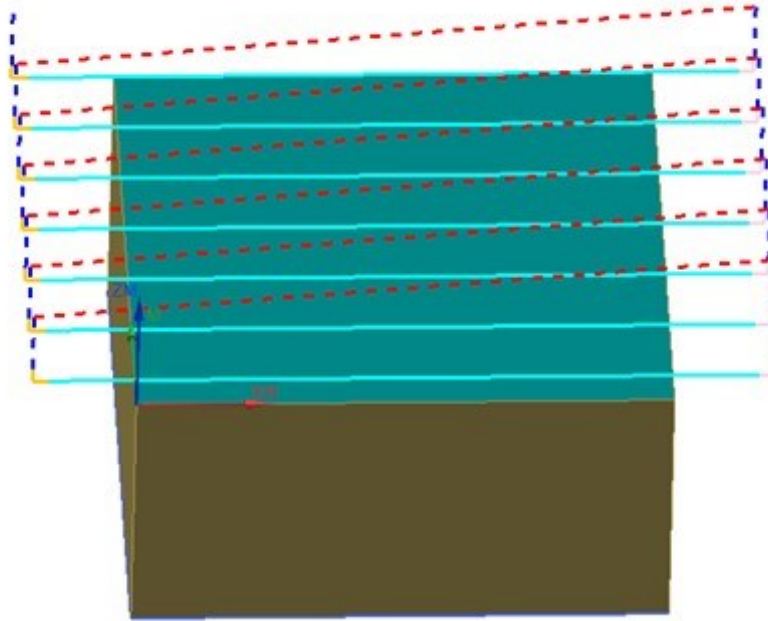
One cut is defined as the cutting tool milling one layer of the workpiece.
